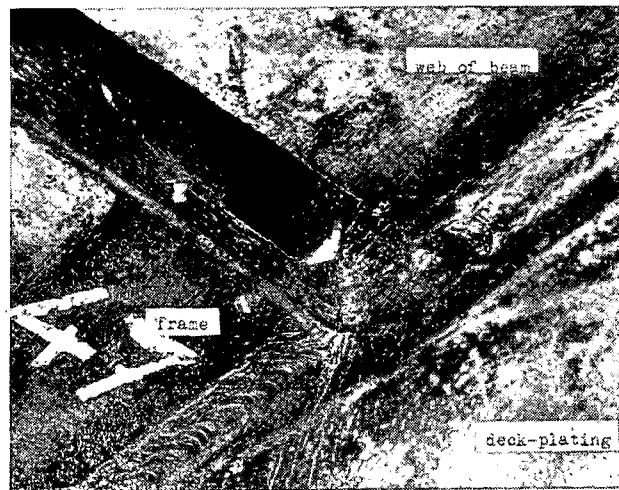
Tiny crack in end-weld, connecting frame to deckplating (dynamic compression; point E of no. 47)
